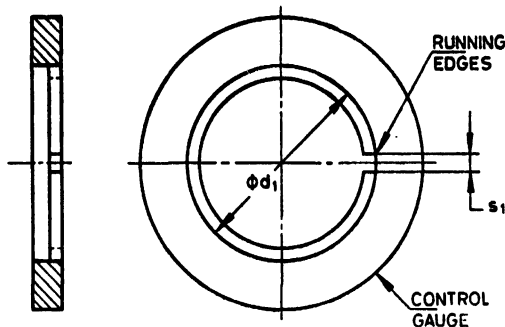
MEASUREMENT OF PISTON RING OUTER DIAMETER
